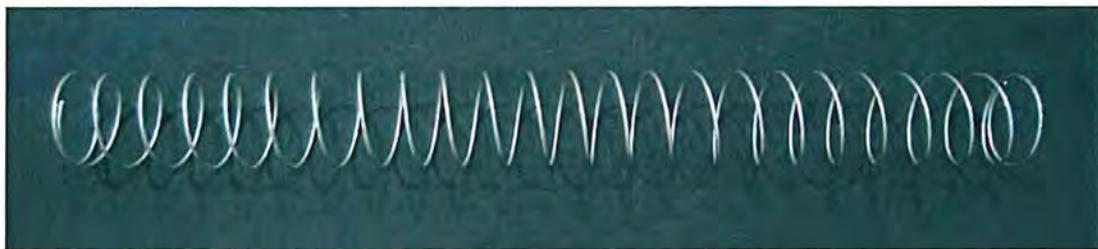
Cylindrical compression spring used in the collapsible drill steel enclosure
